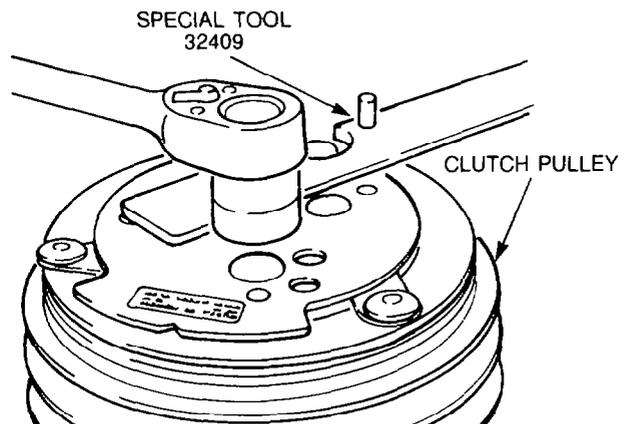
Clutch Front Plate Pulley Retaining Nut — Removal
